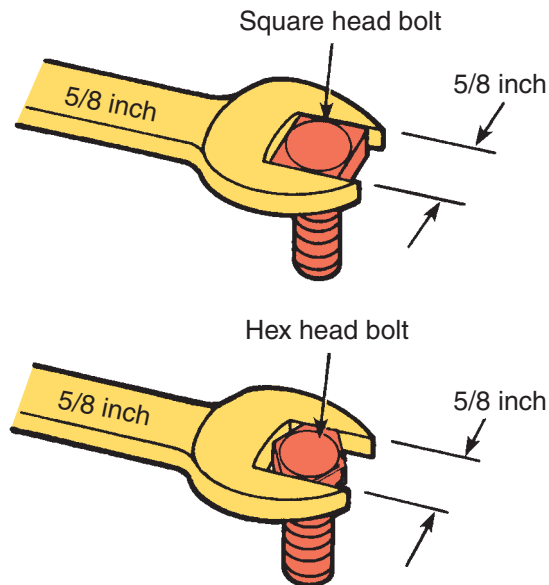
An open-end wrench grips only two sides of a fastener.
